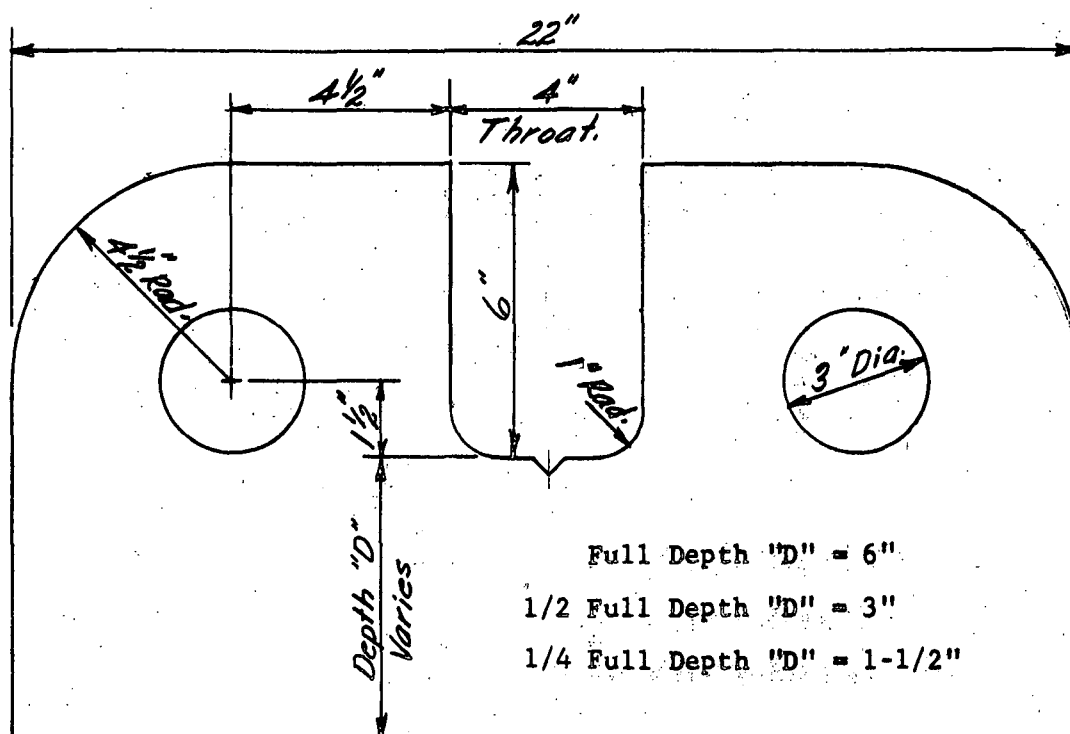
STANDARD THROAT WIDTH BAGSAR TEST SPECIMEN FOR 3-INCH THICK PLATE
